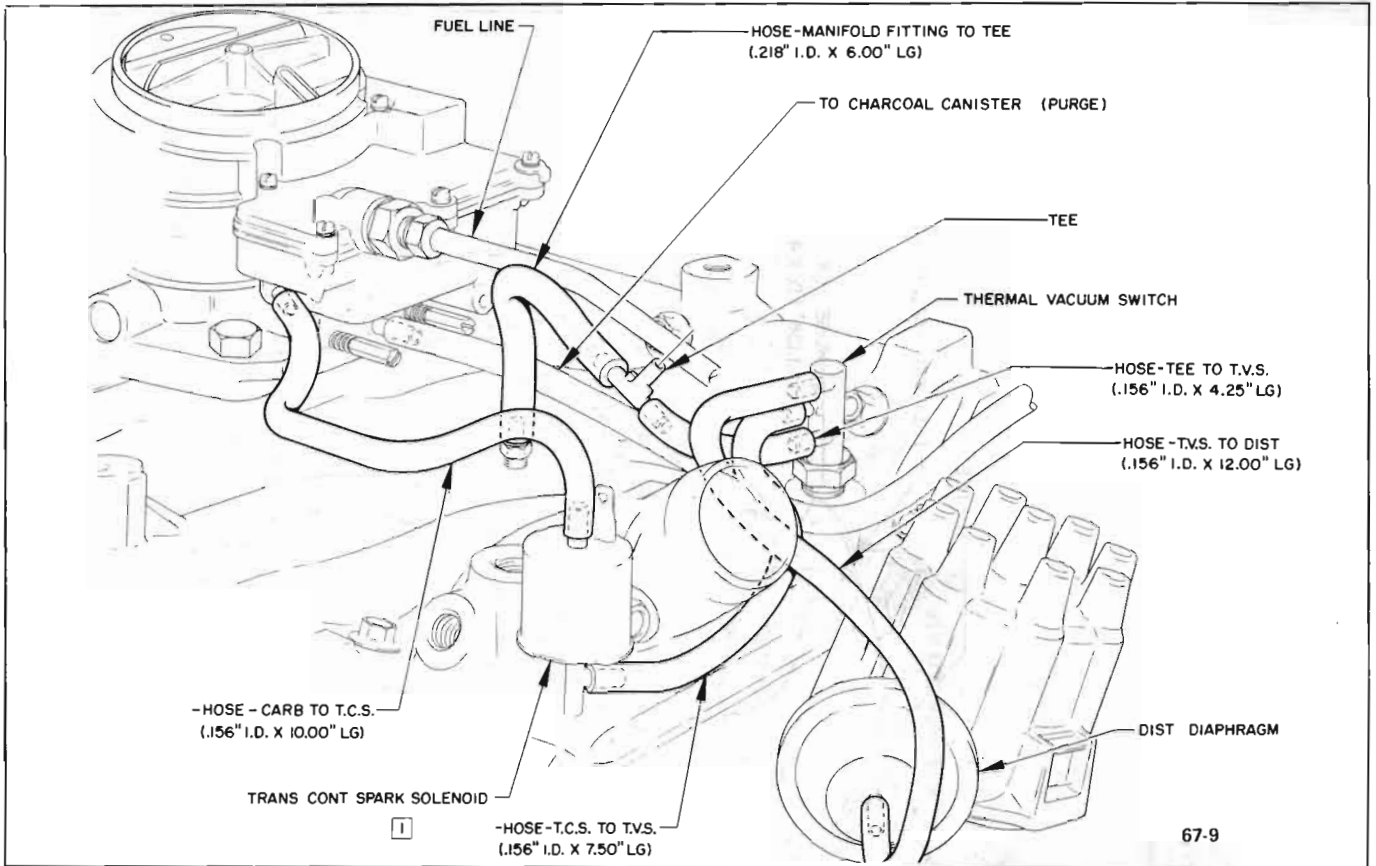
Vacuum Tube Routing - 350-2 Barrel 45000 With A/C and/or Heavy Duty Cooling
